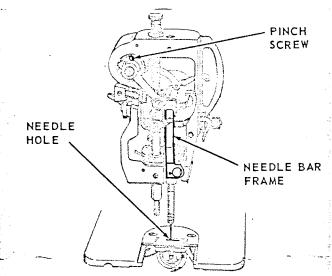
Positioning the Needle (front to rear) on Machines 281-22 and 281-24
